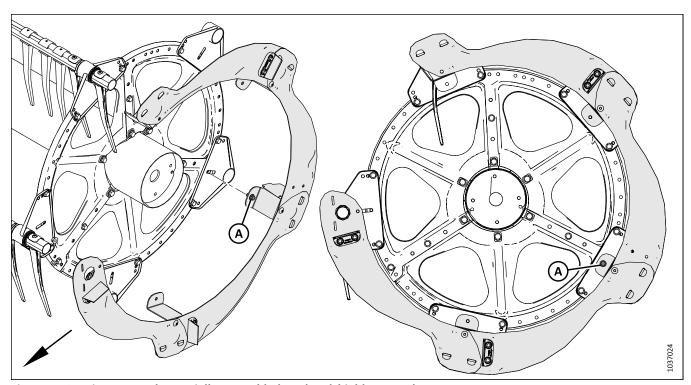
Five-Bat Reel – Partially Assembled Reel Endshields on Reel
